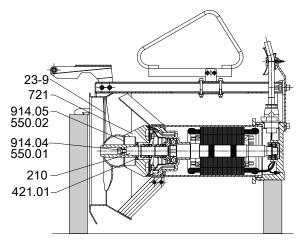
Mounting the axial propeller of an Amaline 200, 300 with motor 0 6 or 2 6, 400
